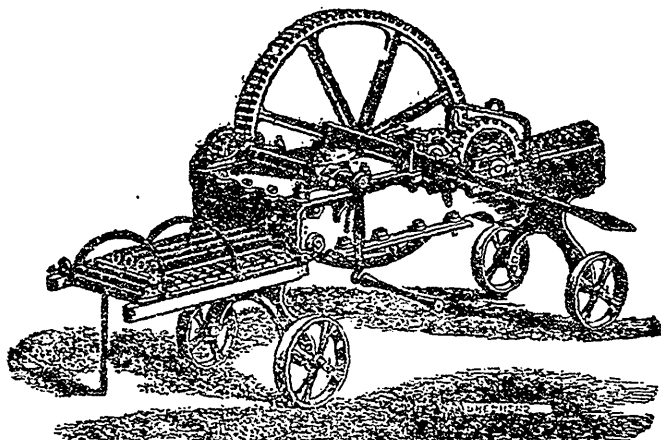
Drain-Tile making Machine—Small size—Hand power.
